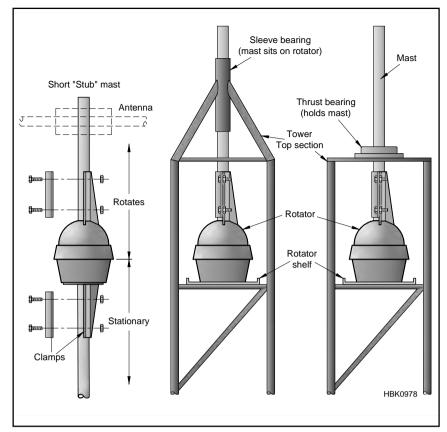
Rotators can be mounted directly on masts or inside latticestyle towers. Rotators can also be mounted directly on the top of towers (not shown).
